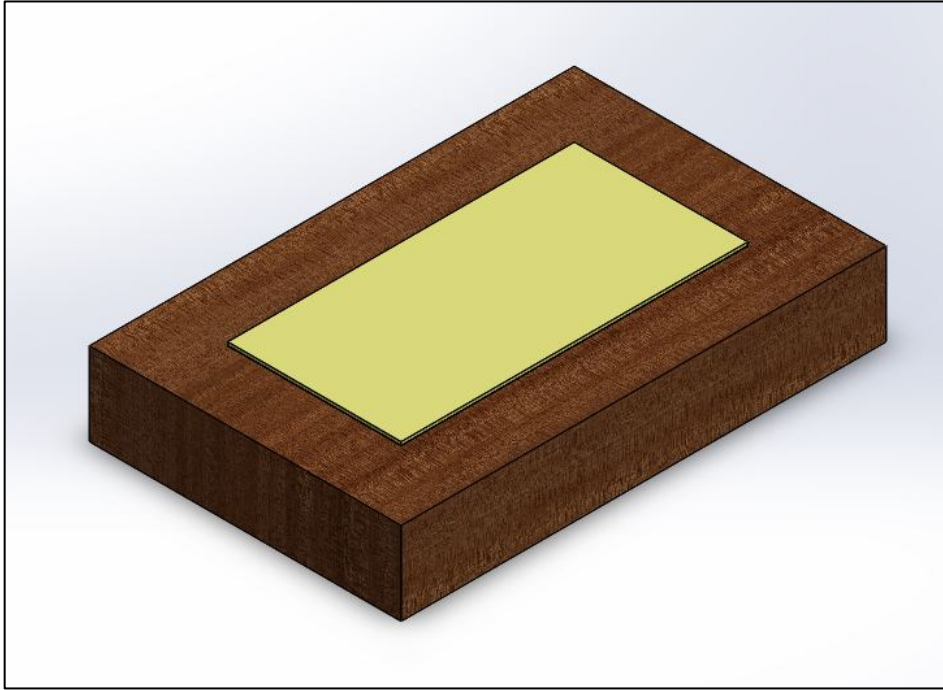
Isometric view of entire ITES storage container system Solidworks assembly used in the system transient thermal study.
